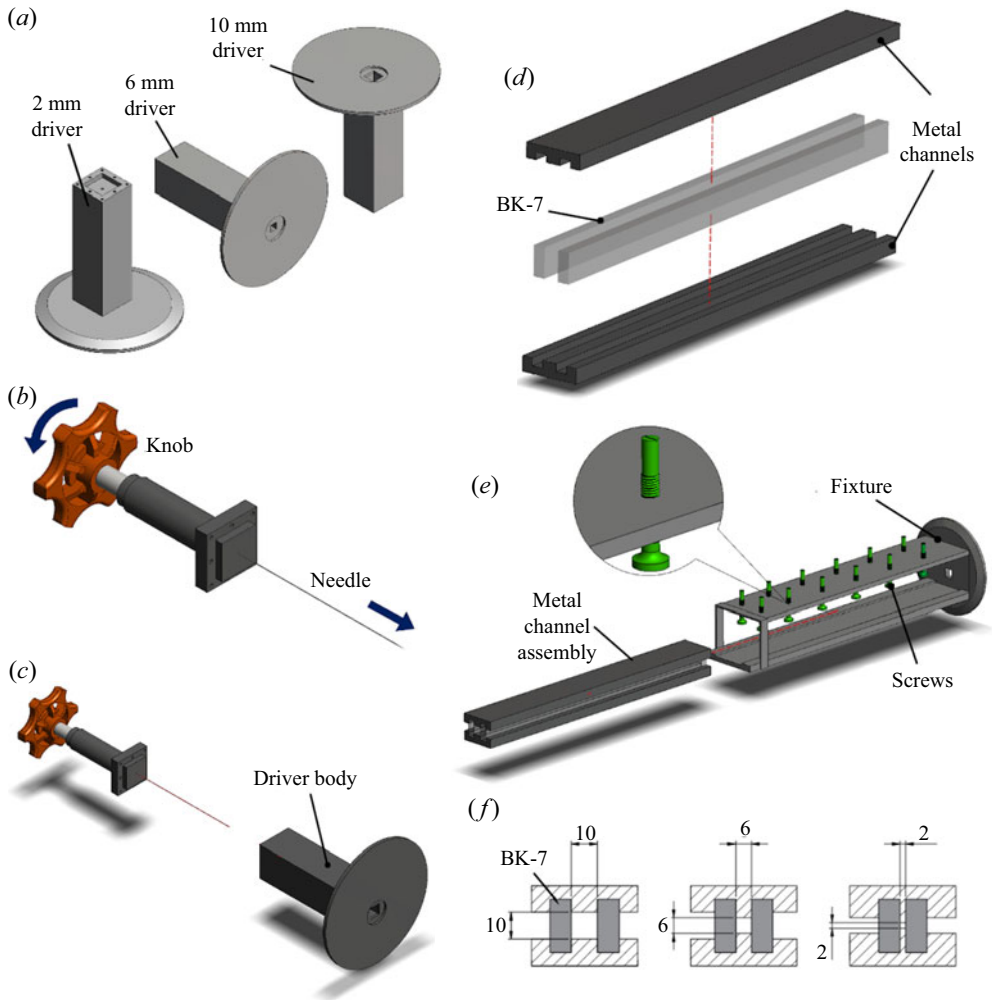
(a) Computer-aided design models showing the driver sections of the three shock tubes. (b) Diaphragm puncture mechanism used in the driver section. (c) Assembly of the diaphragm puncture mechanism in the driver section. (d) Exploded view showing the assembly of the BK-7 glass slabs. (e) Assembly of the driven section of the shock tube. (f) Cross-section showing the driven section of the three shock tubes.
